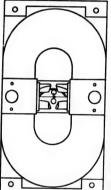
Assembly of magnets, pole pieces, and suspension.
